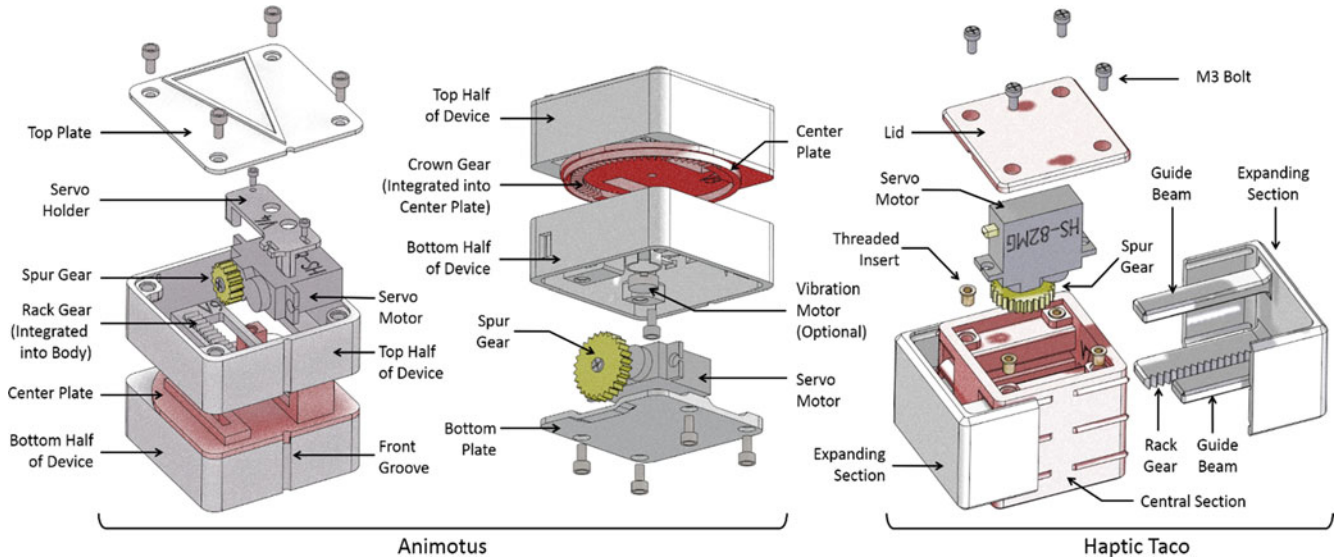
Assembly views of the Animotus and Haptic Taco. The left image shows the upper half of the Animotus, illustrating the linear extension mechanism. The middle image is an exploded view of the lower half of the Animotus, illustrating the crown gear rotating mechanism.
